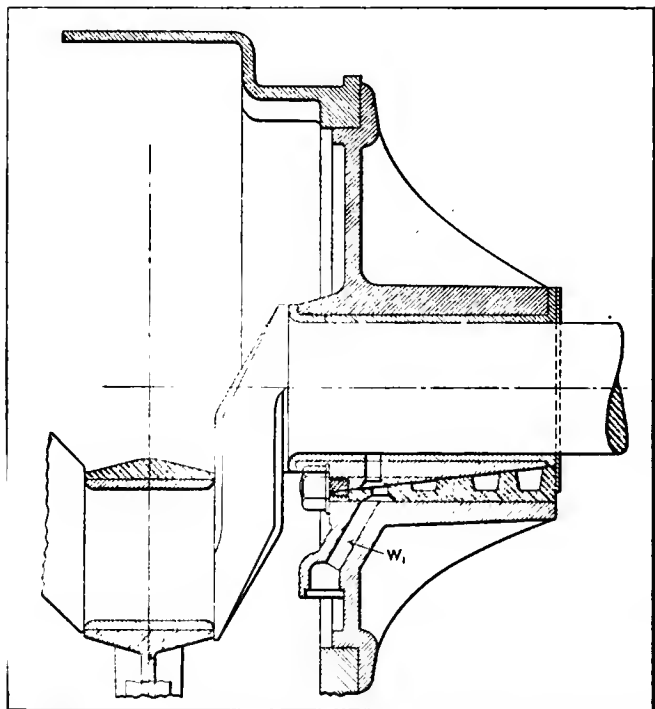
Rambler, offering evidences of refinement in method of lubrication, involving the crankshaft
